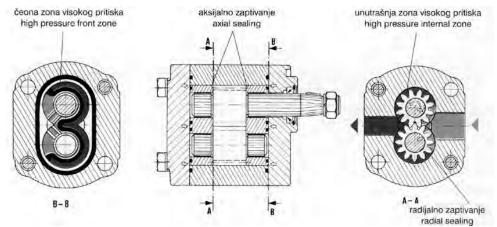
Cross-section of gear pump with external gearing (family 3115..)
